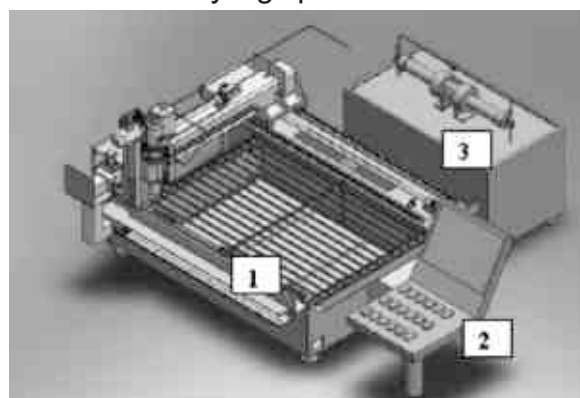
3D abrasive waterjet cutting and mechanical machining equipment
